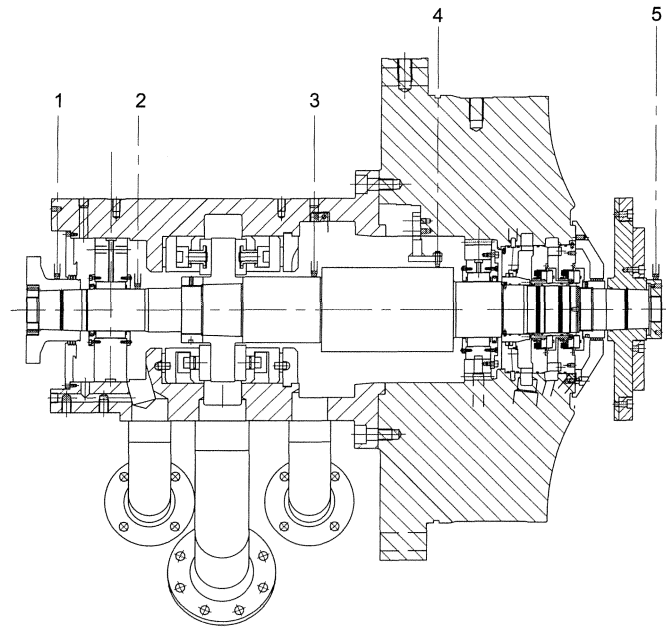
Compressor Cartridge with Dummy Impeller for Testing Purposes.
